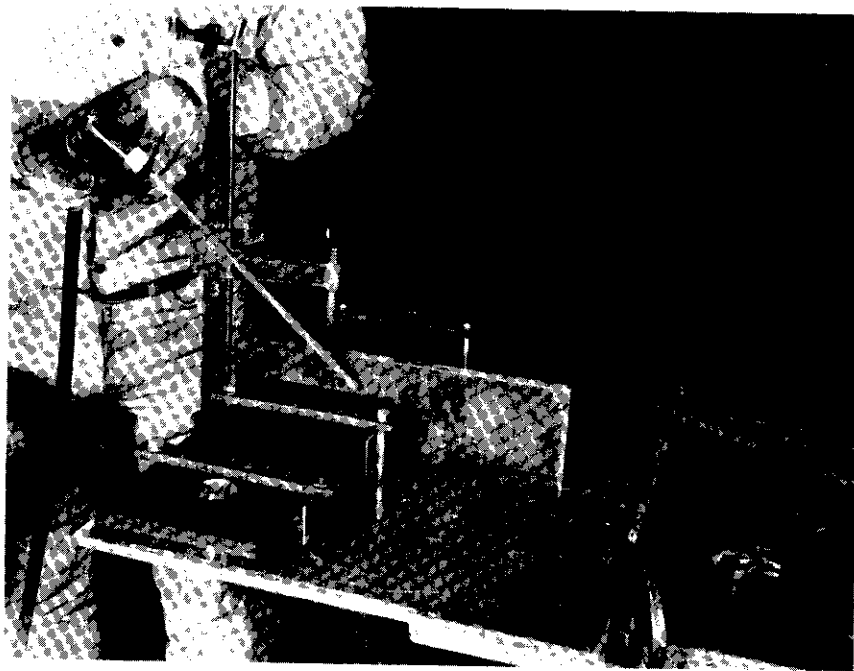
Welding of Detail 21, Specimen.
